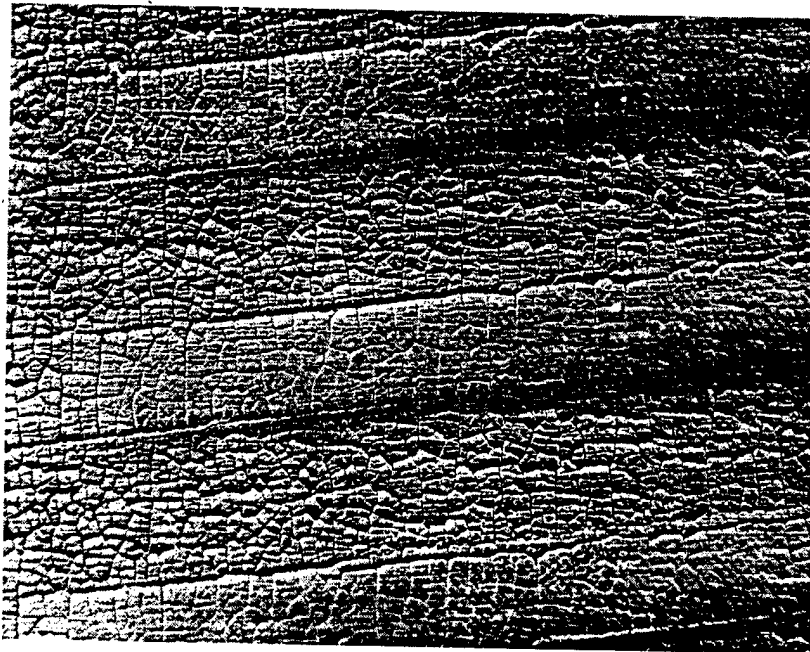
Magnified view of heat checking on the bore surface of a rifled 155-mm cannon tube.
